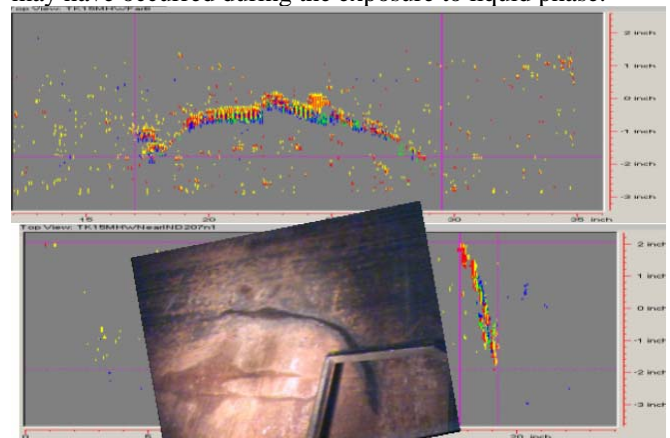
Stress corrosion crack near repair weld in tank.
